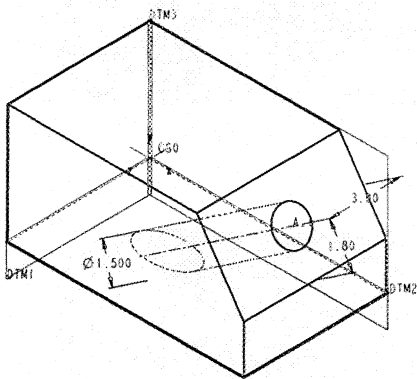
(m) Modifying the Hole Diameter from $\varnothing 1.25$ to $\varnothing 1.50$
